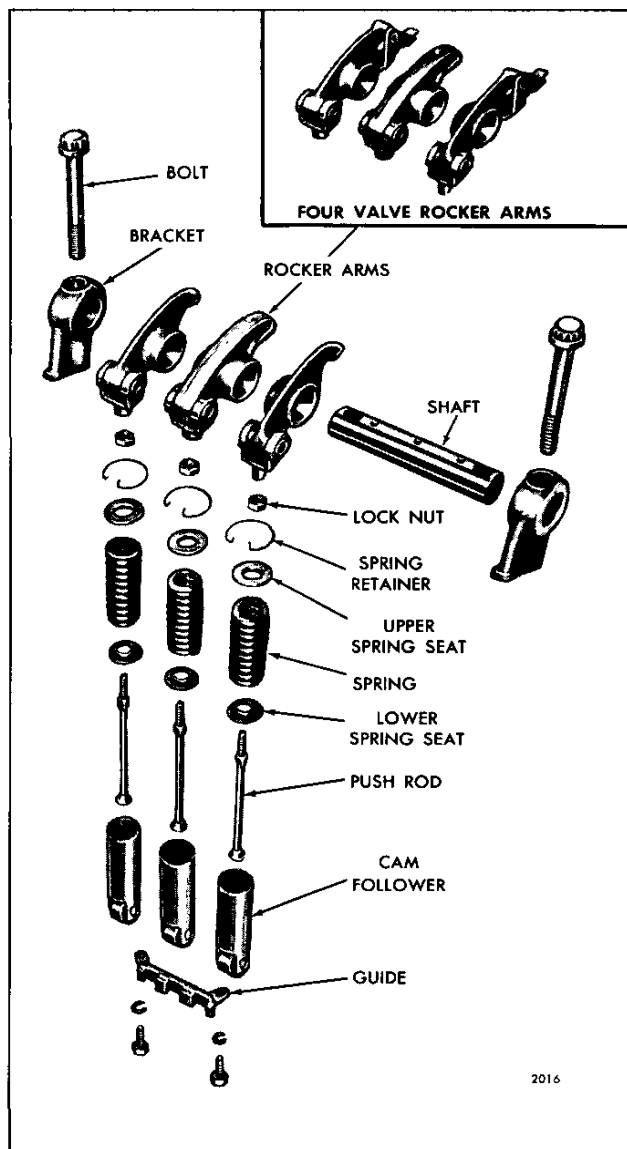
Valve and Injector Operating Mechanism and Relative Location of Parts
